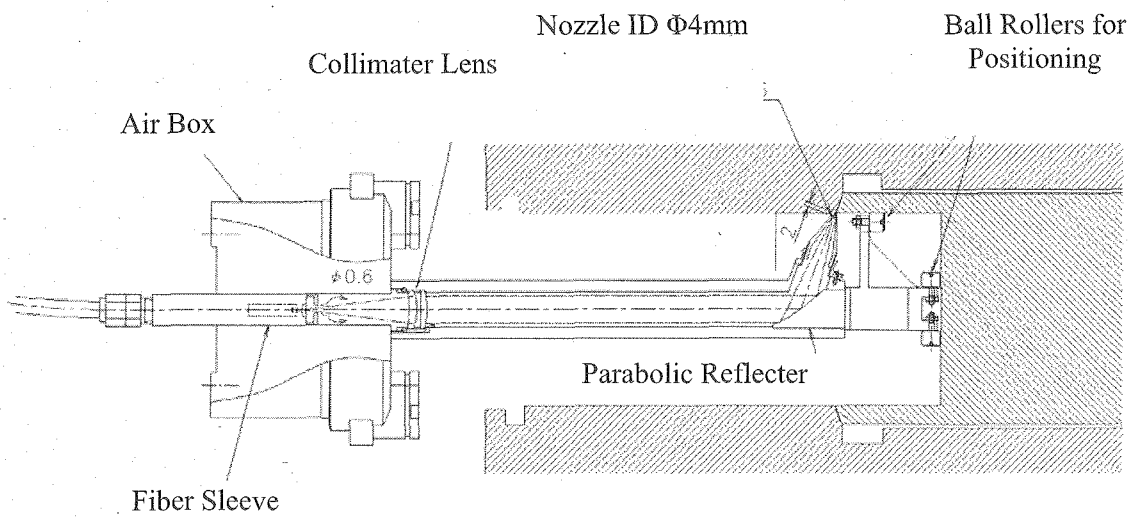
Welding Tools for FW Support Leg
